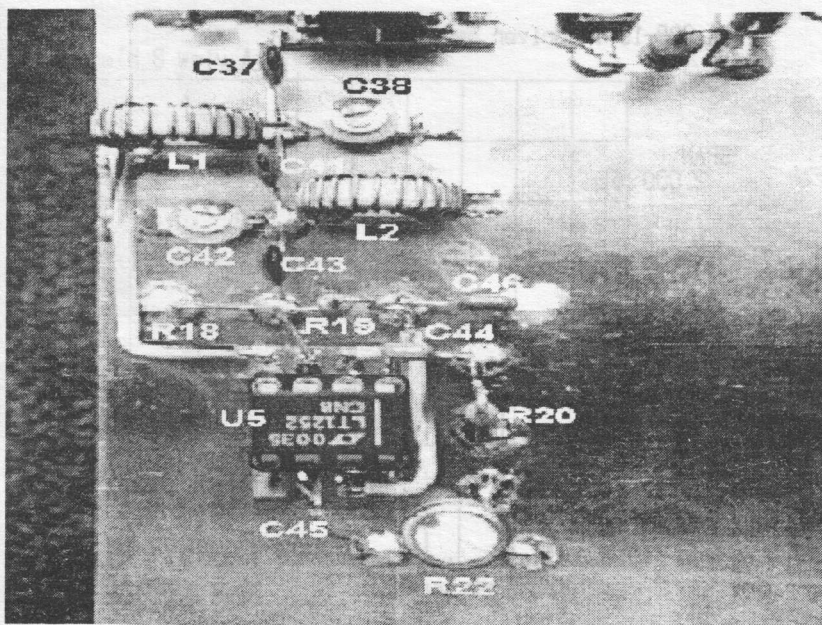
Transmit Bandpass Filter and Driver Parts Layout
